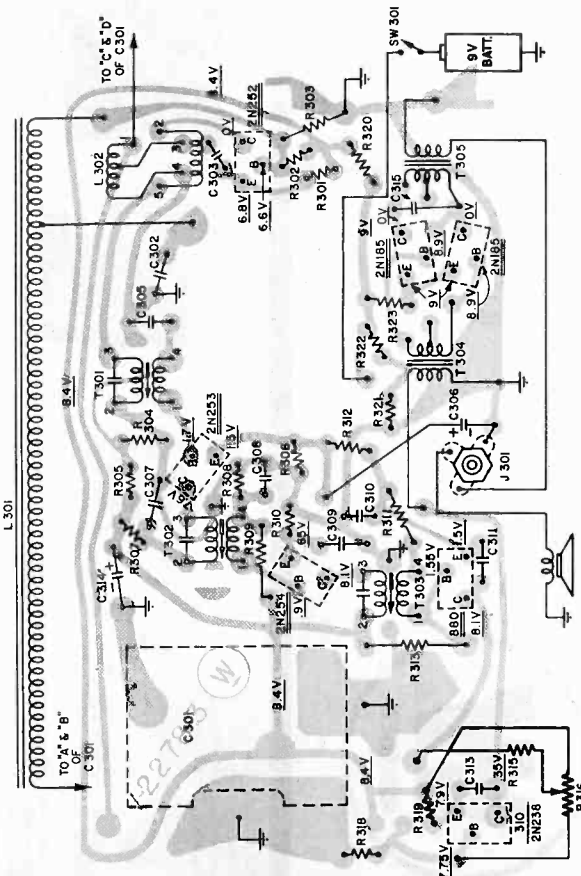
BOTTOM VIEW OF PRINTED BOARD SHOWING TOP COMPONENTS SYMBOLICALLY
